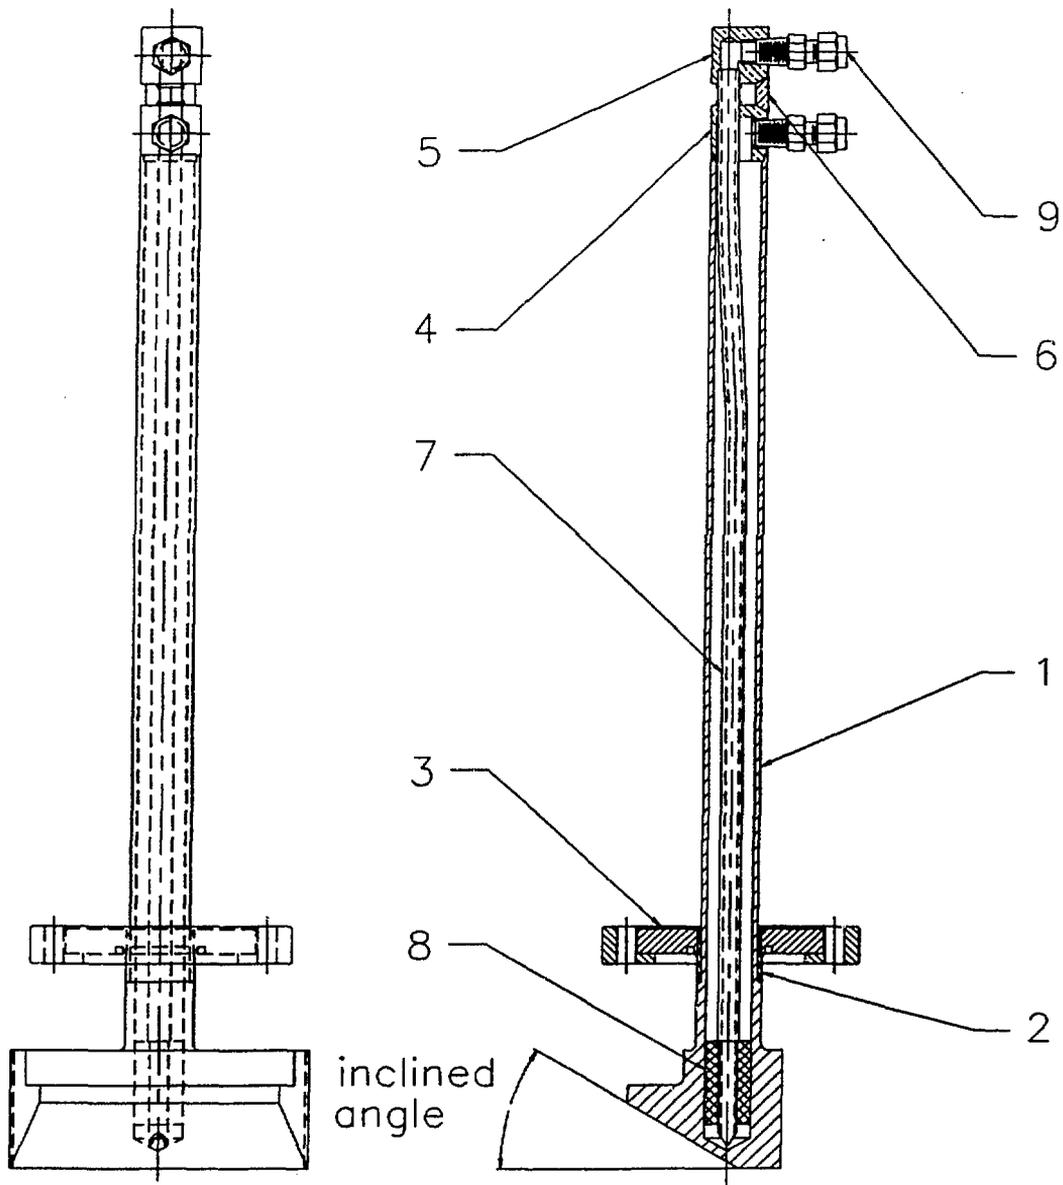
Cooling assembly of the APS BM front photon shutter: (1) cooling block and tube, (2) interface stainless steel tube, (3) rotatable conflat flange, (4) exit port, (5) entrance port, (6) port support, (7) inner tube, (8) copper mesh.
